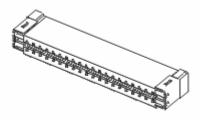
Flex cable connector (Part number: FLE 125 01LDVA)
